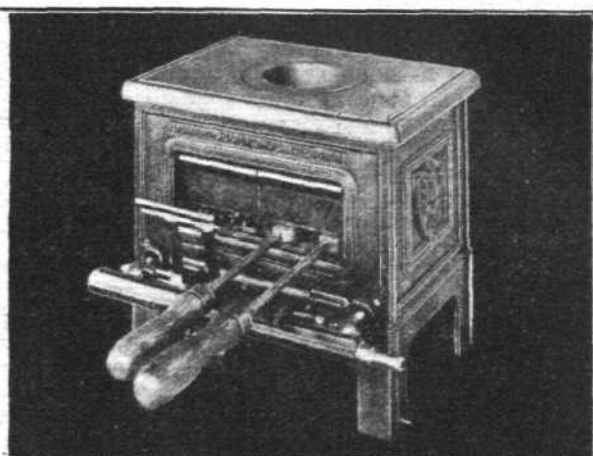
“Richmond” gas-heated soldering iron heater.
